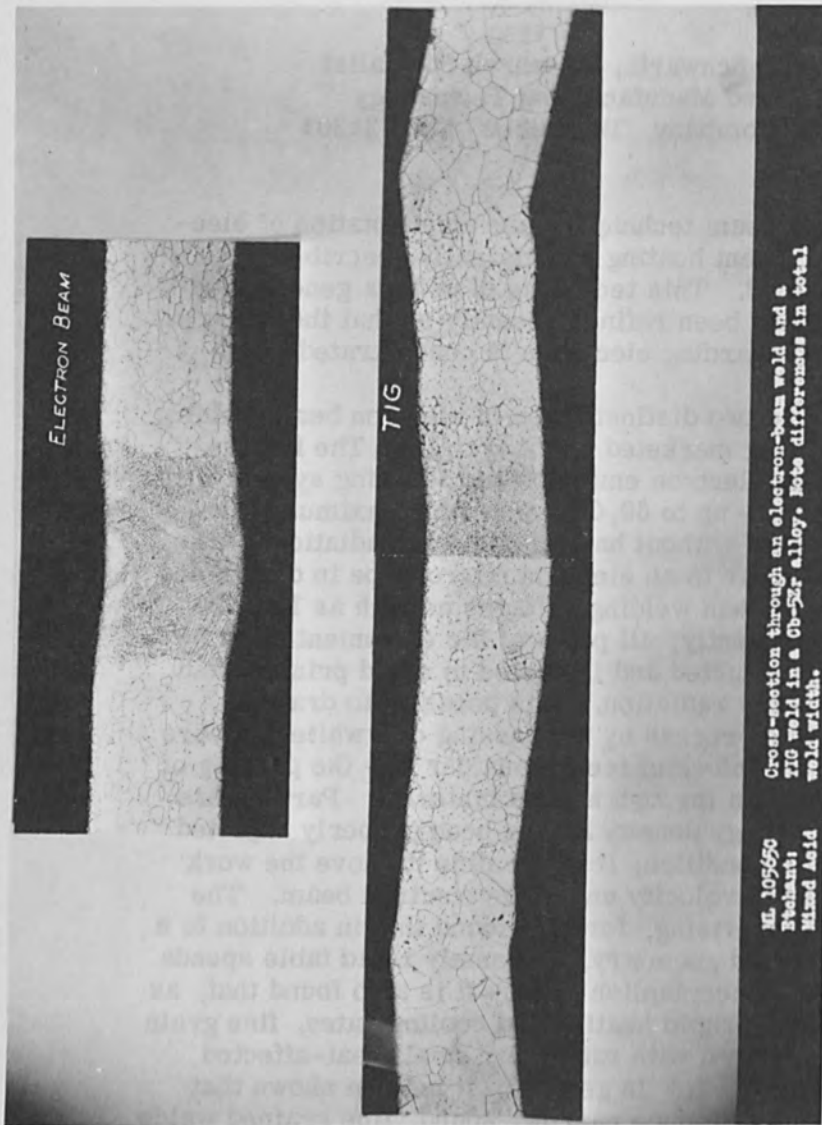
A small weld and very small heat affected zone in D-14 columbium alloy by electron beam welding in upper photo as compared with the increased weld and heat affected zone by TIG welding in lower photo.
